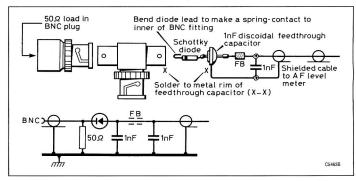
Exploded view of a detector and 50Ω load using a BNC T-fitting
